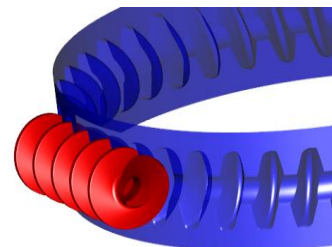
[3]Cylindrical worm gear (Wheel wide tooth example)
